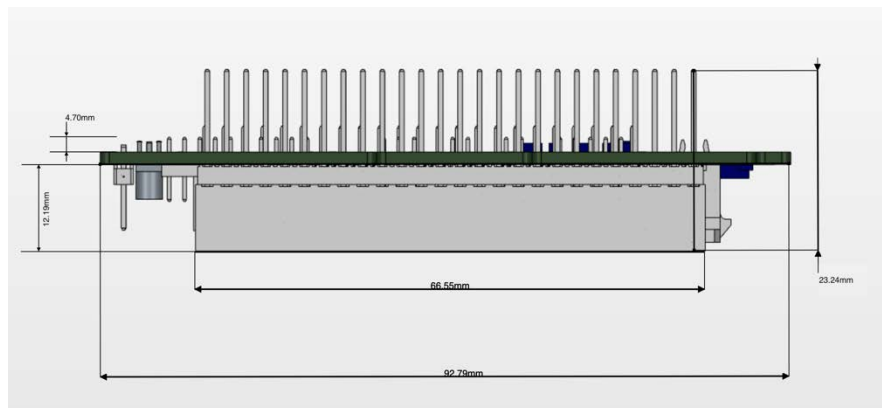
STX3 PC104 Board Dimensions – Part 1.
